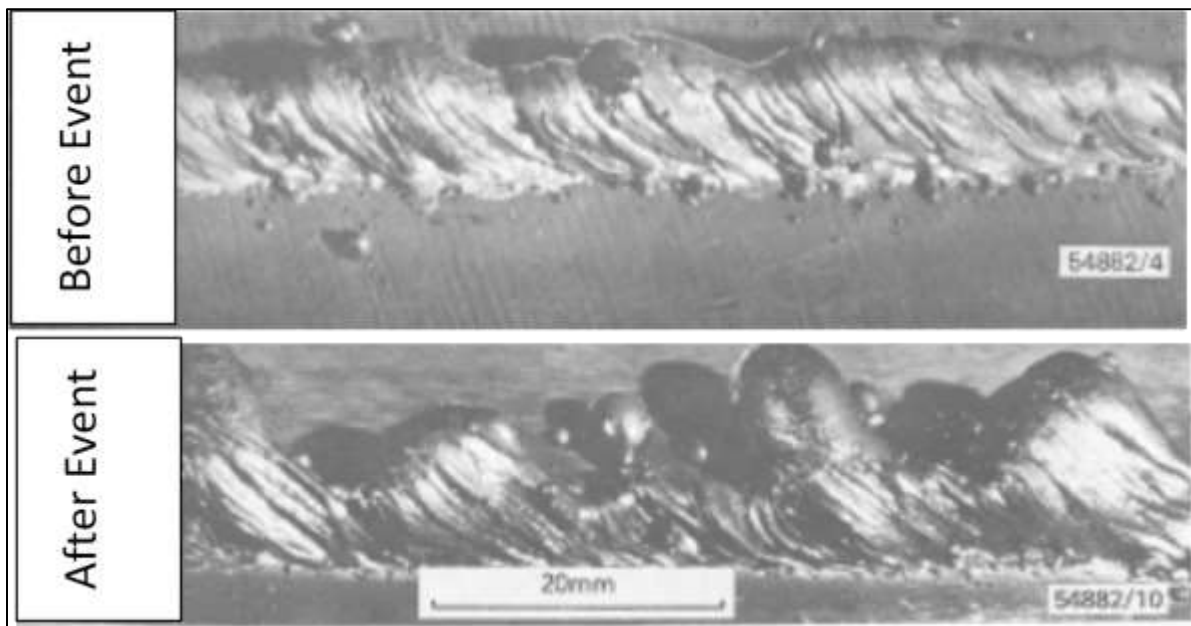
Weld defect caused by major discharge (Sanderson 1986)
